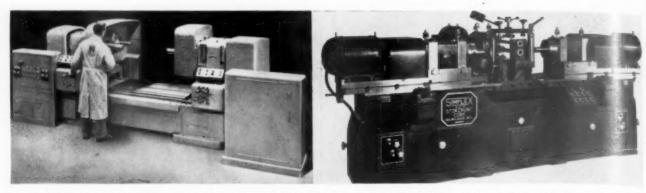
Typical precision boring machines. The machine at left is a double-end Bore-Matic, by Heald Machine Company, Worcester, Mass., and the 3-head machine at right is a Simplex by Stokerunit Corporation, Milwaukee, Wis. Both machines are designed for precision boring of large work-pieces. Note that while stub boring bars produminate the lateral bars on the Simplex are piloted in the fixture. Facing tools may be incorporated with the bars.
